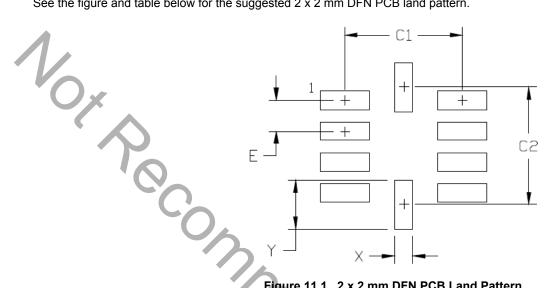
2 x 2 mm DFN PCB Land Pattern
